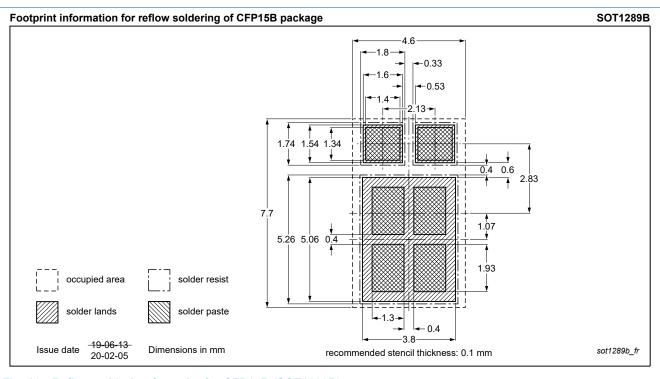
Reflow soldering footprint for CFP15B (SOT1289B)
